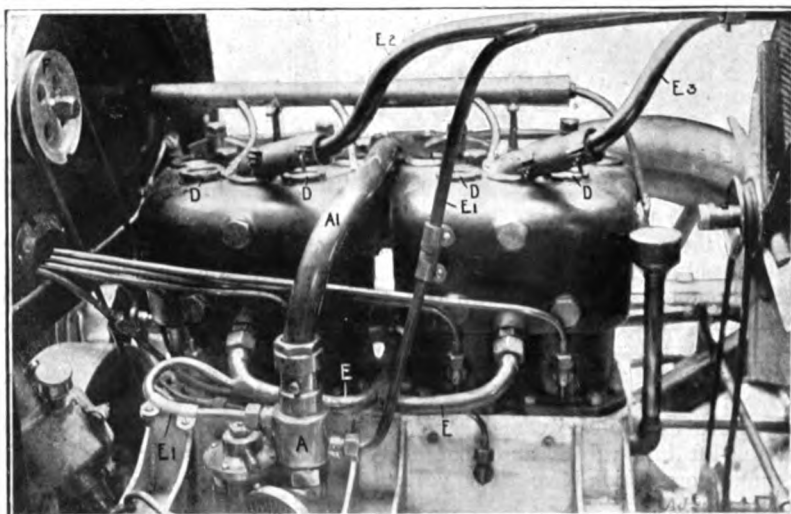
View of the 16-h.p. Métallurgique Engine, showing the "Sthenos" carburettor, A, and the screw fittings, D, for the high-tension ignition plugs.
